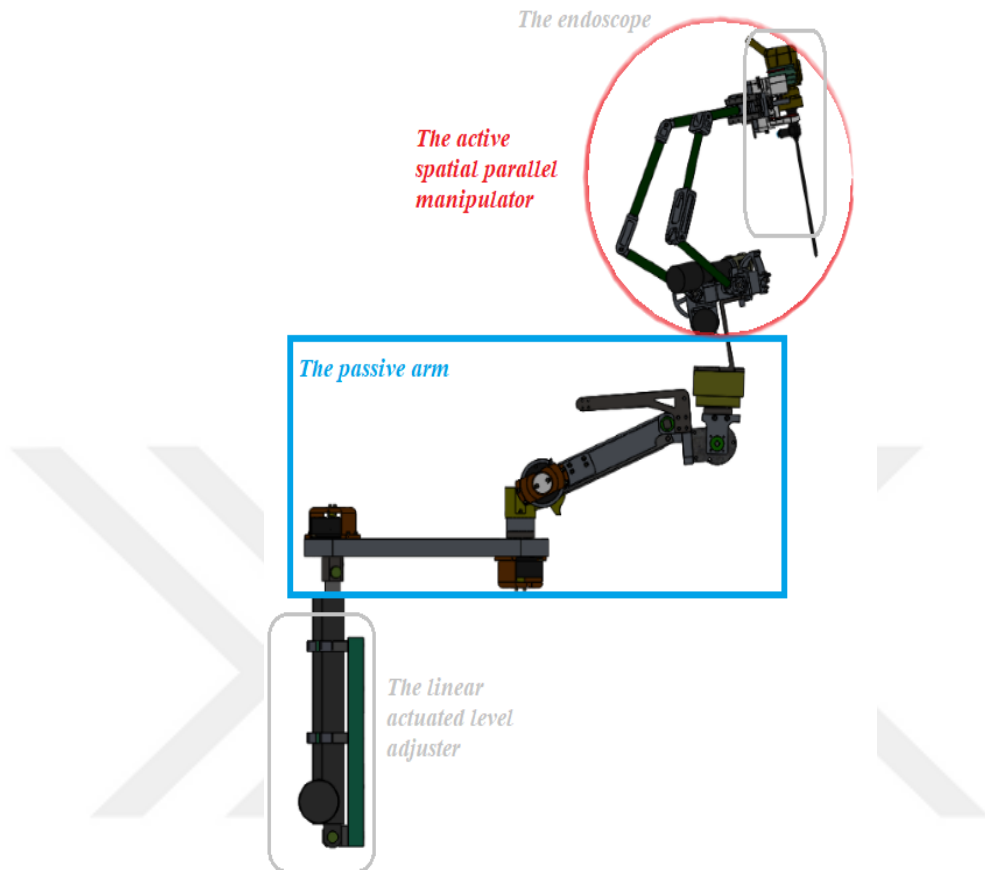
The CAD drawing of the robot endoscope holder arm
